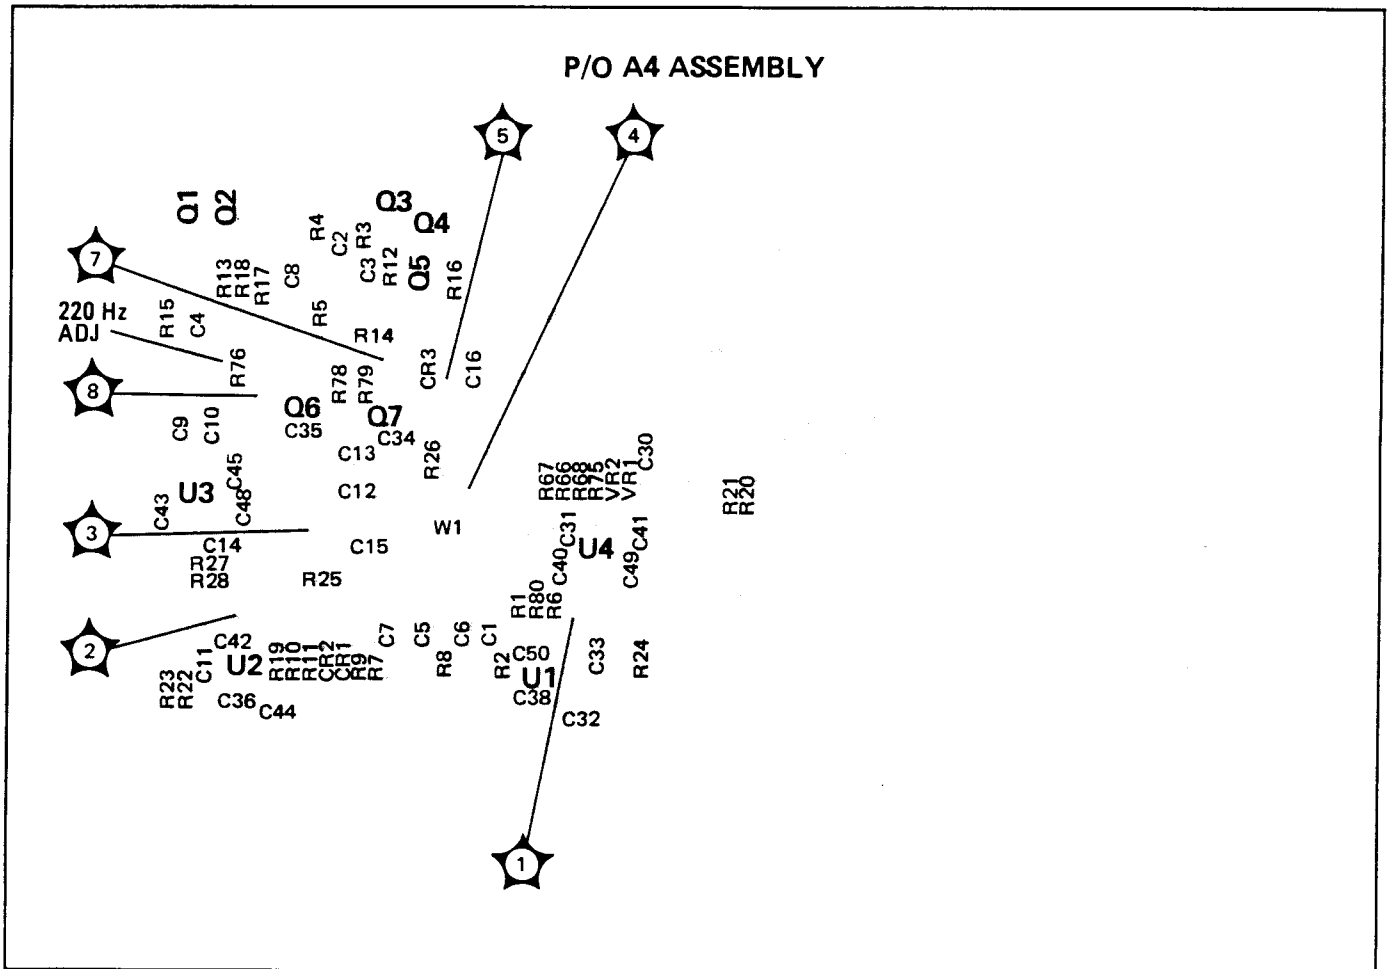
P/O A4 Assembly (AC Ampl/Sync Detector) Component and Test Point Locations
